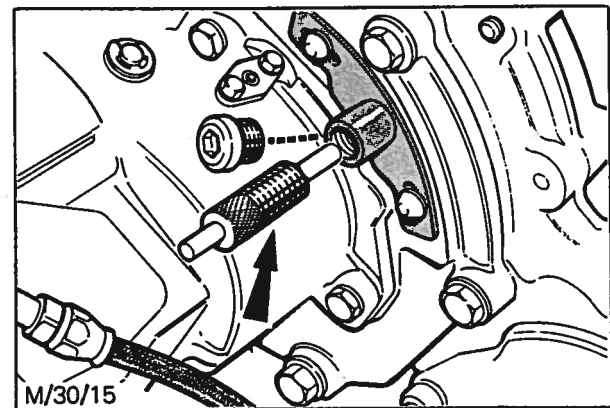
Injection Pump Timing - Automotive and G.P. Governed Pumps
